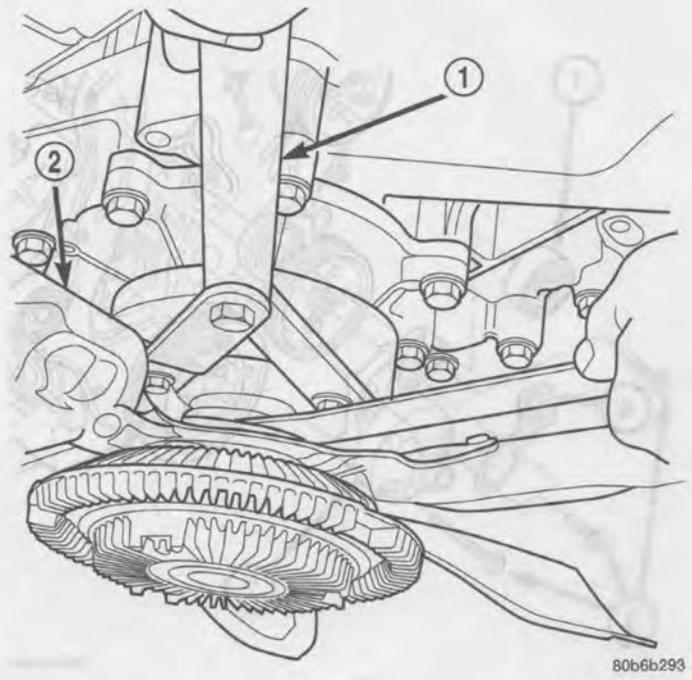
FAN DRIVE VISCOUS CLUTCH - TYPICAL
